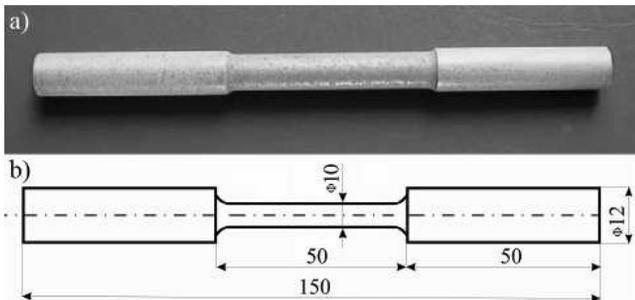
a) photo of the test specimen, b) line drawing of the sample
